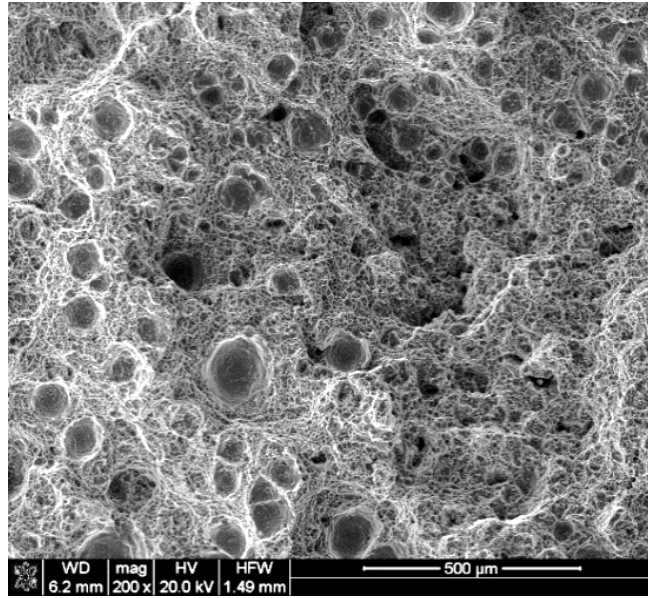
Porosities on the fracture surface of the as-welded sample (fracture toughness test).
